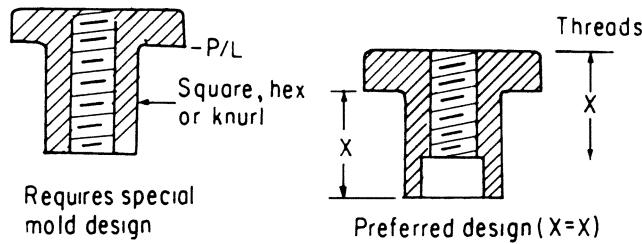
Automatic unscrewing is expensive when molding, unless the plastic part is designed to prevent turning during the unscrewing cycle. When thread strength is a requirement, fine threads should not be molded, particularly in RPs where the threads could be mainly resin and thus very brittle. However, with proper molding procedures, based on type of compound or composite used and the design of the mold being gained through experience, no problem should develop.
